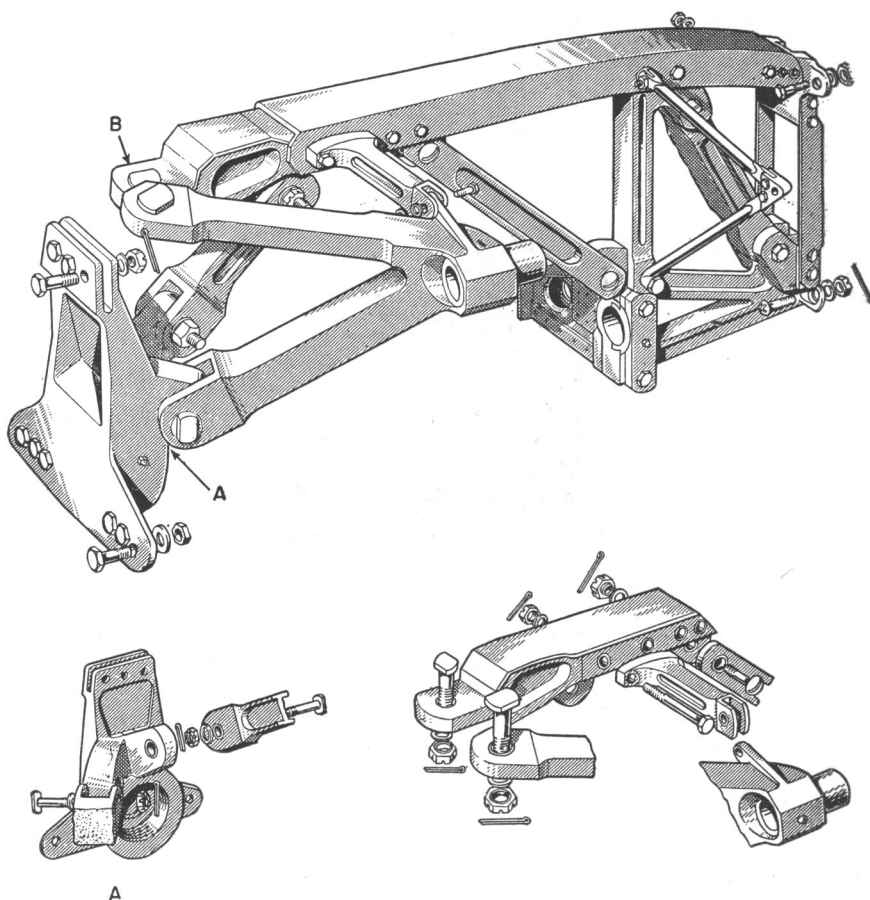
The landing gear rib of the Ryan FR-1, a built-up structure, is located at the outboard end of the center section adjacent to the joint where the wings fold for carrier storage.
